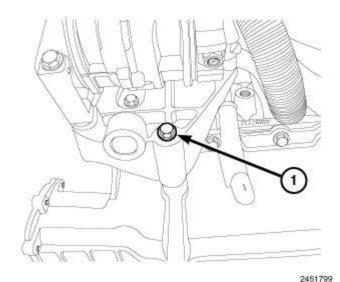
A/C Compressor Mounting Bracket Lower Bolt Courtesy of CHRYSLER LLC
